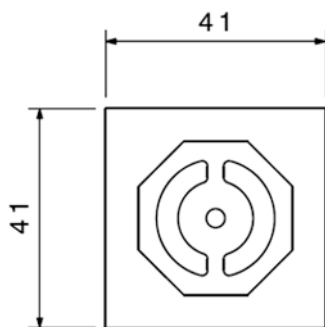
Dimensions of the ZUM BT328 board in millimeters
